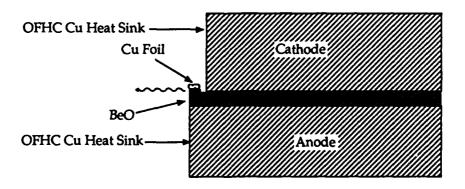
Schematic diagram of the finished 1 cm linear laser bar assembly prior to mounting in the test fixture. The heat sinking is achieved by sandwiching the submount between to Cu heat sinks as shown.
